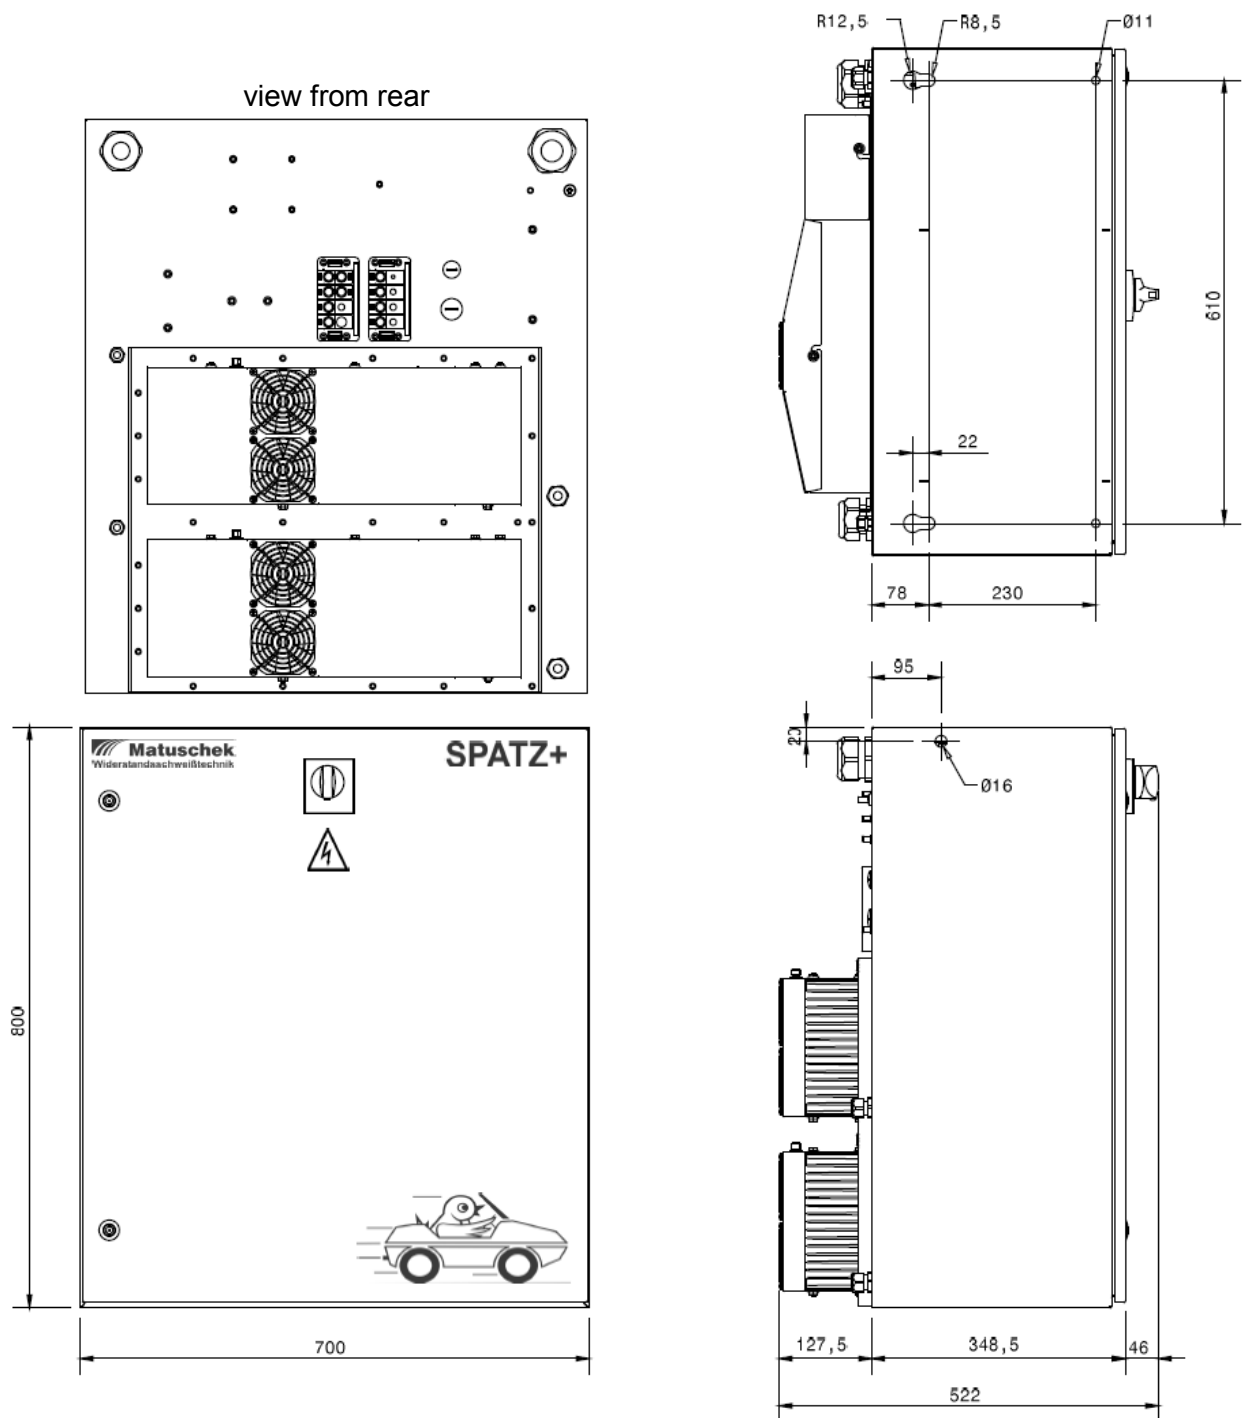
Dimensions in mm of the SPATZ+ CL-TS cabinet for two SPATZ+ weld timer and components for two servo drives
